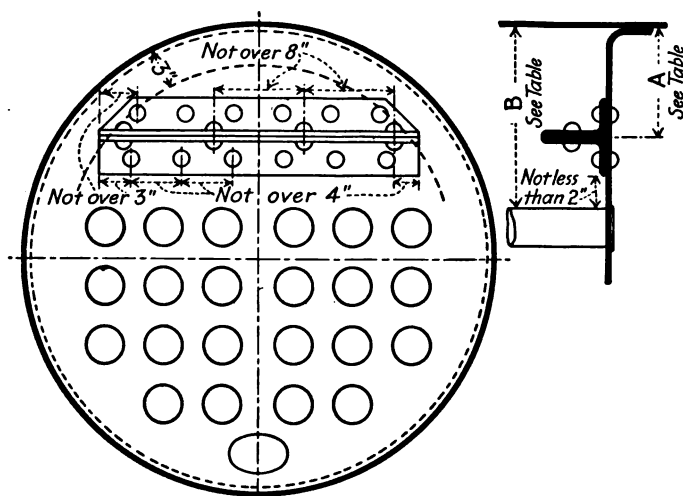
STAYING OF HEAD WITH STEEL ANGLES IN TUBULAR BOILER
